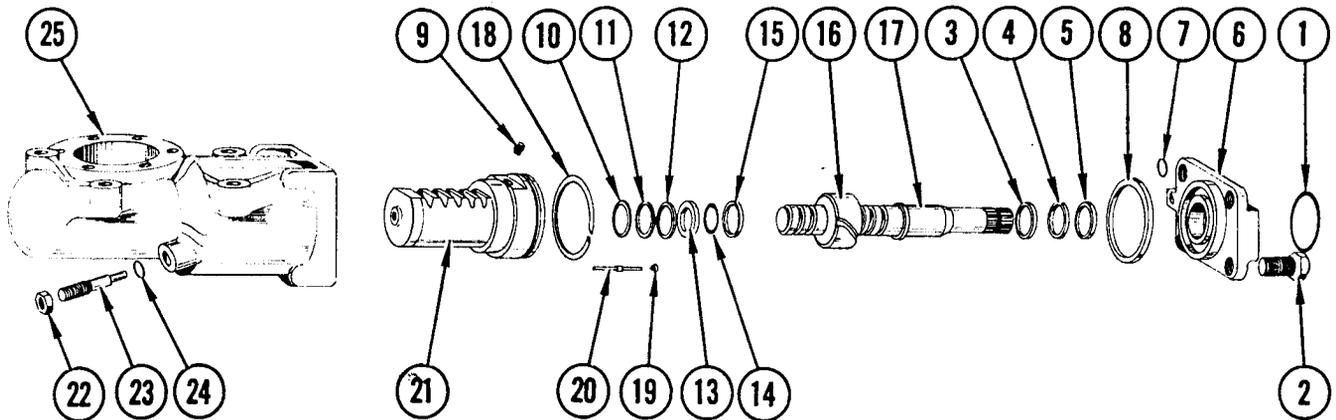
EXPLODED VIEW OF PISTON RACK AND BALL FOLLOWER ASSEMBLY
